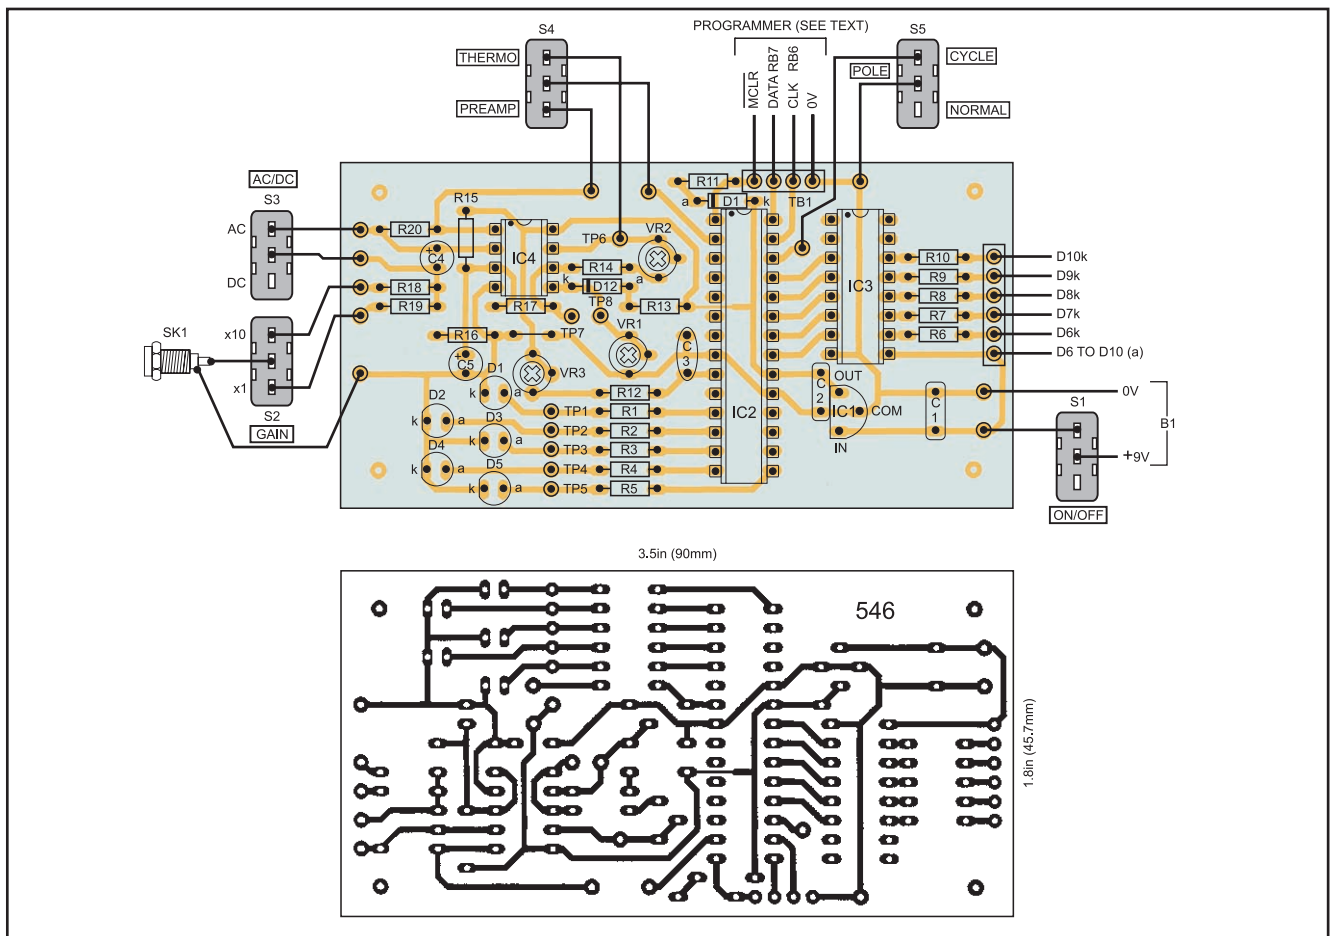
Printed circuit board component layout, wiring details and full-size master for PIC Ambilux. Take care with component orientation
